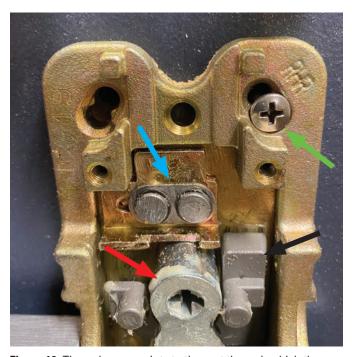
The red arrow points to the part through which the tailpiece of the cylinder passes, and the black arrow points to the slide.
